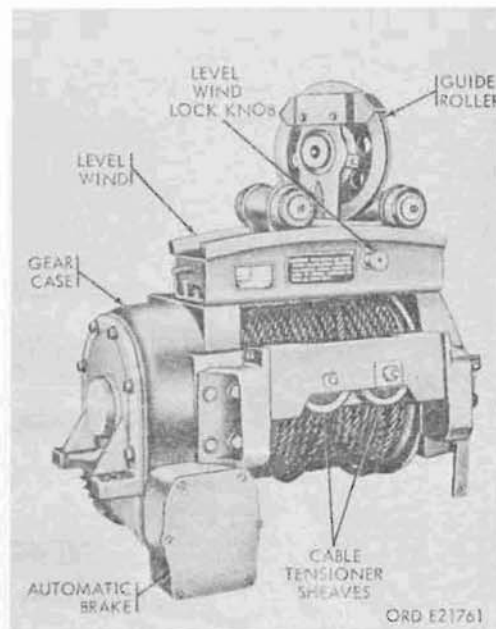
Left rear view of rear winch removed from wrecker truck M60
